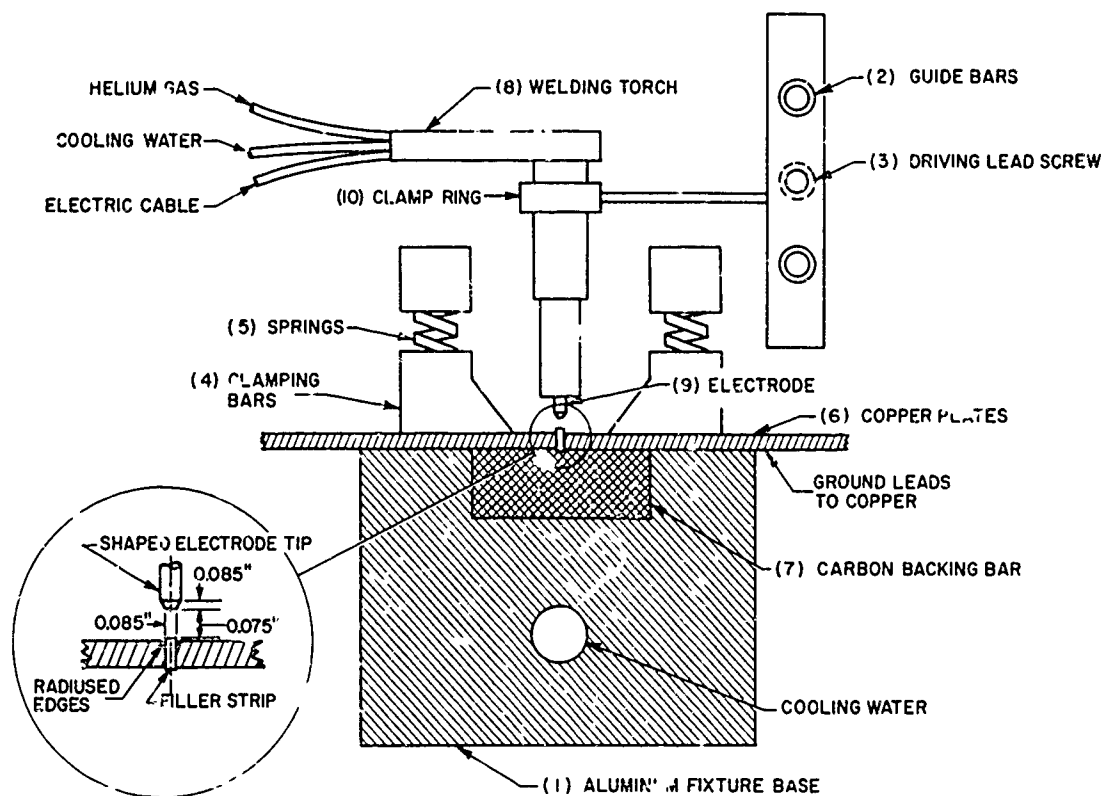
Sketch of the Welding Apparatus Used in Building the Mark V Generator Magnet
